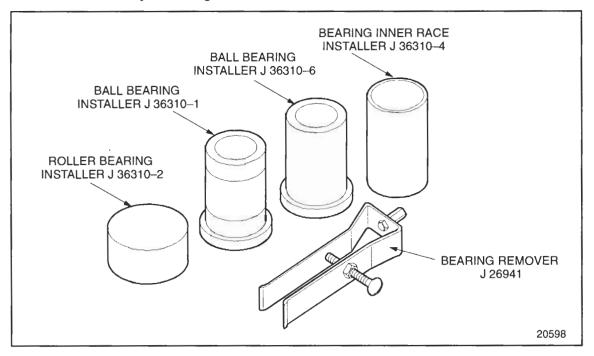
Air Compressor and Fan Drive Service Kit Set
